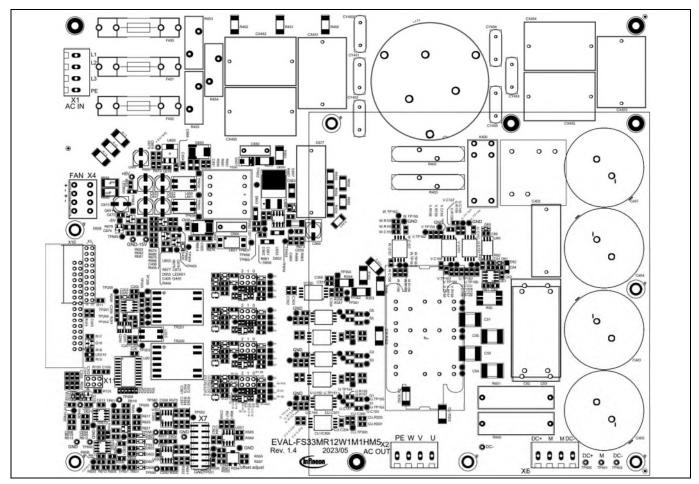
Top assembly print of the EVAL-FS33MR12W1M1HM5 evaluation board
